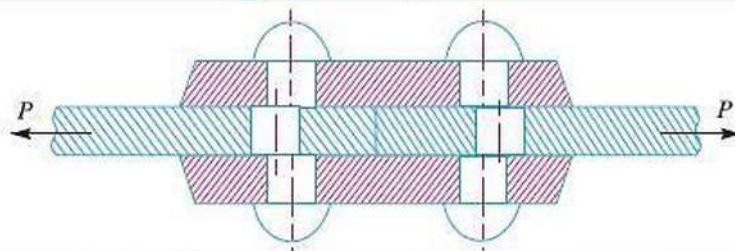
Shearing off a rivet in double cover butt joint.
